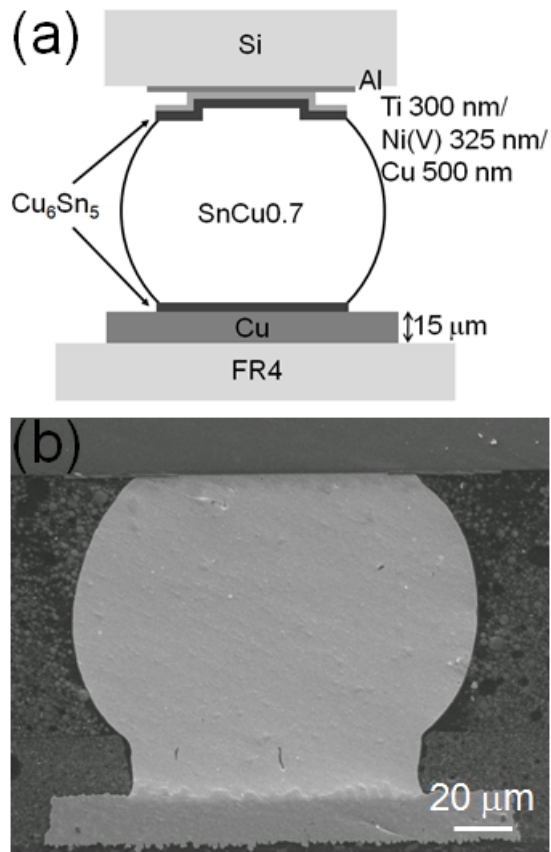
(a) The cross-sectional schematic shows the flip-chip solder joints from ASE. (b) The cross-sectional SEM image of flip-chip solder joints as prepared by ASE.
